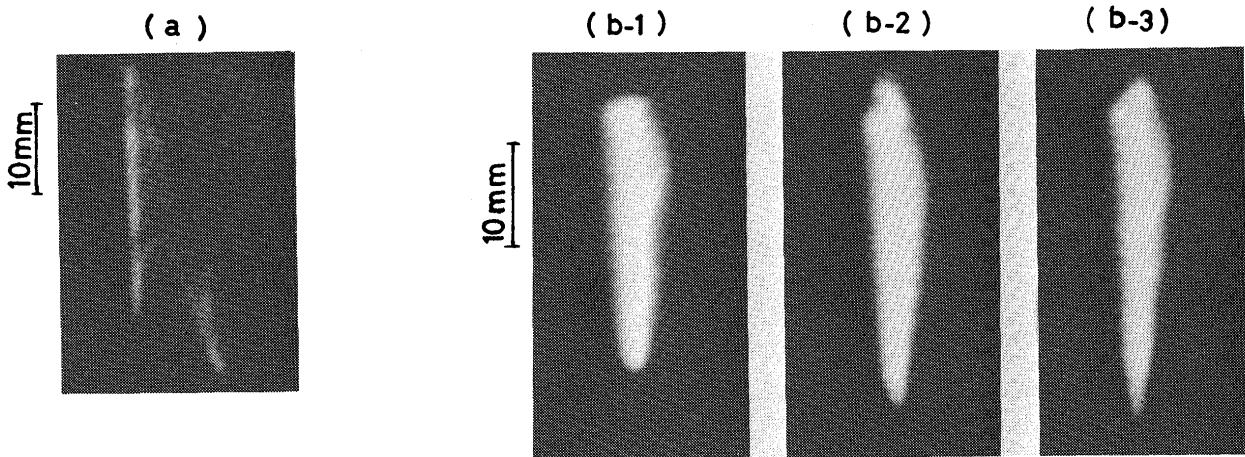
Appearance of typical beam holes during welding by use of Beam hole X-Ray observation method as illustrated in Fig. 13, Al-7075, 60 mm.
